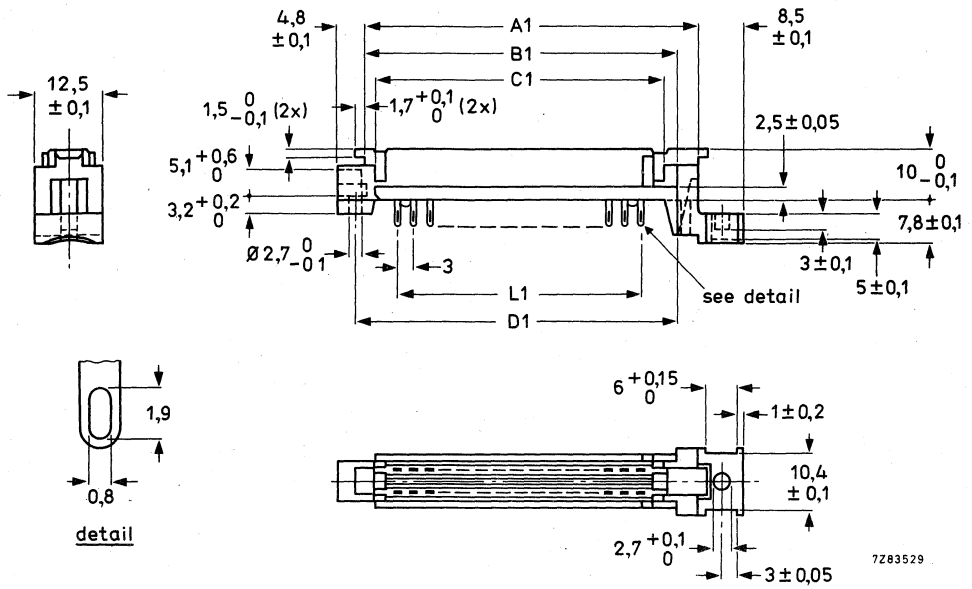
Female part with solder tags; see Table 3 for dimensions A1, B1, C1, D1 and L1.
